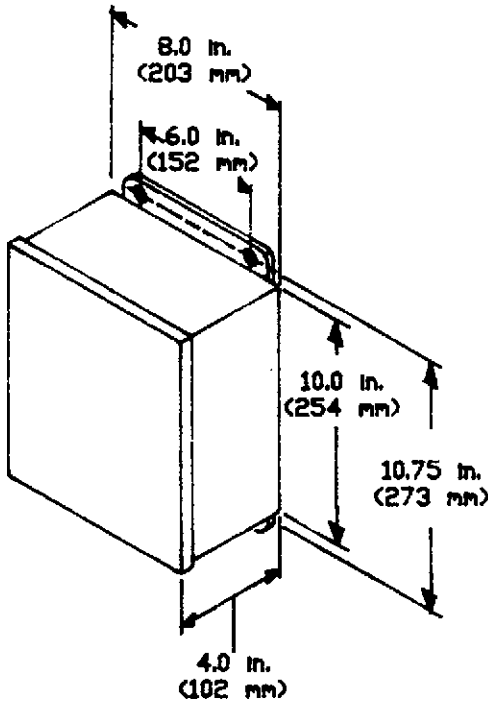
1200/1220 I/O Box: Mounting Dimensions
